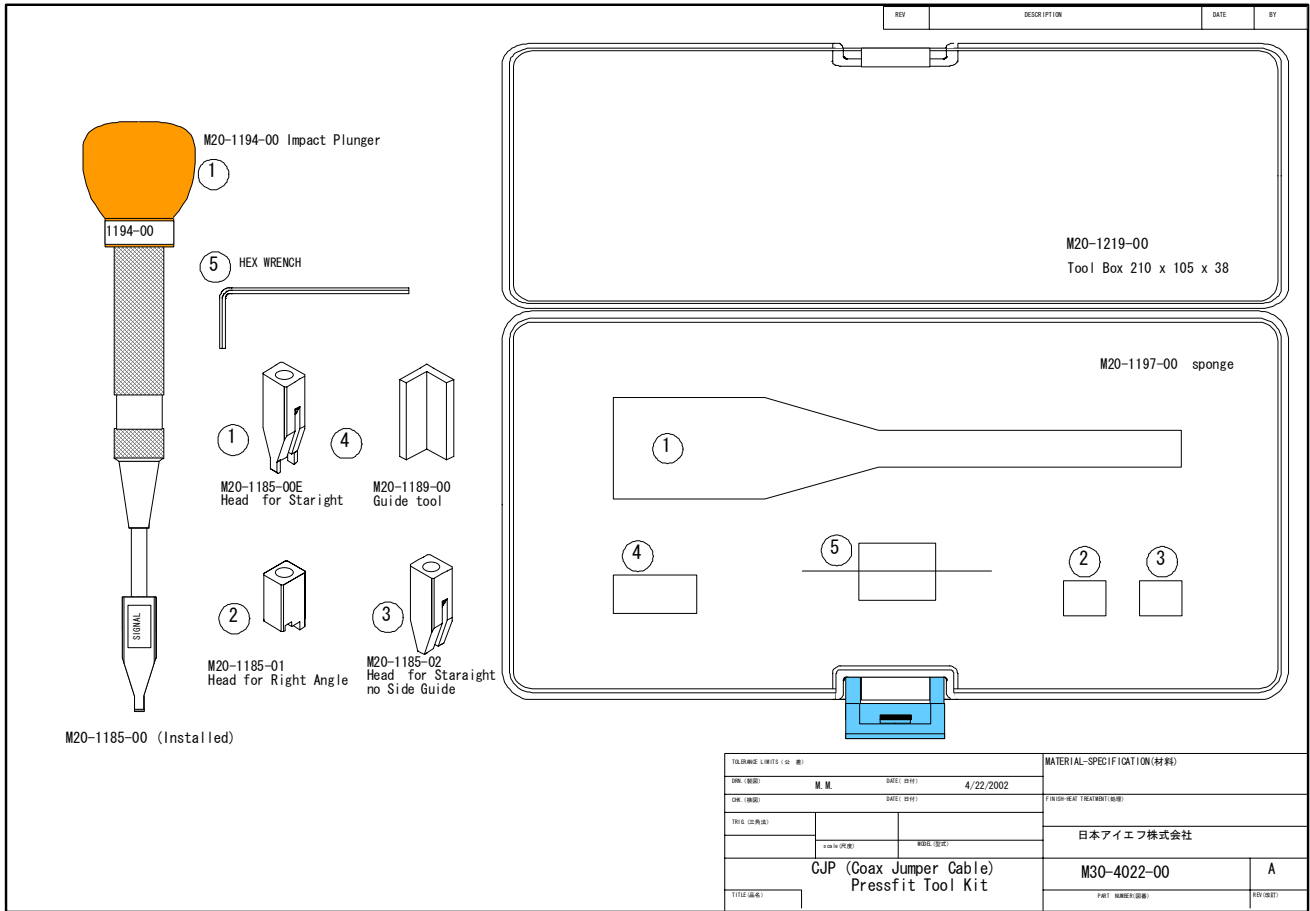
M30-4022-XX Coax Jumper Cable Press fit tool
